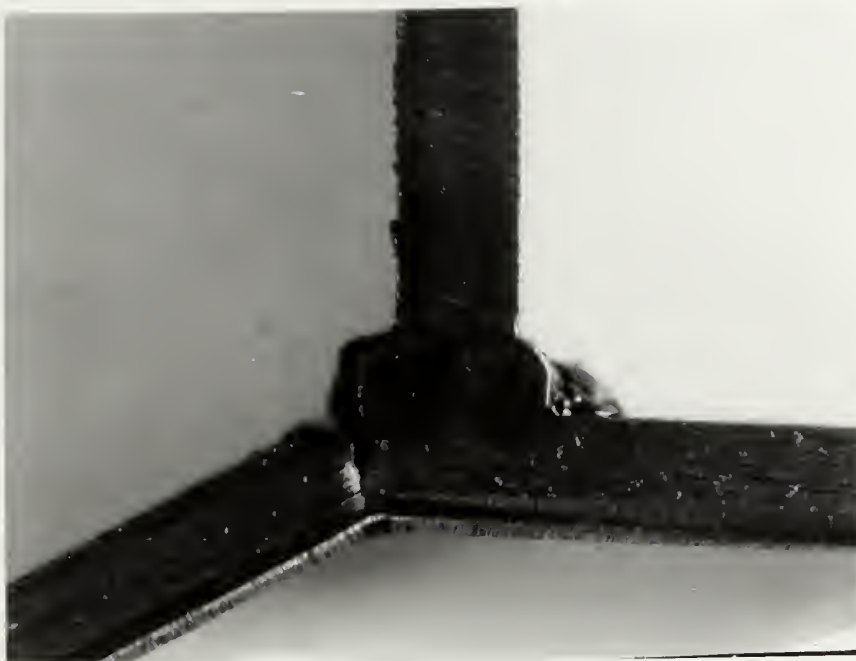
Single pass underwater weld showing excessive undercut close to plate intersection. Bead profiles for fillet weld lap joints are similar to those for fillet weld tee-joints.
